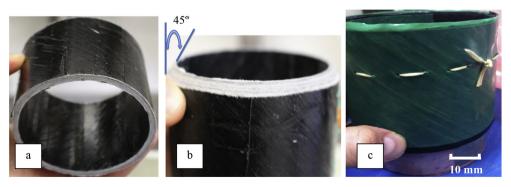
a) Composite crushing tube, b) bevelled trigger mechanism, and c) stitching technique.
